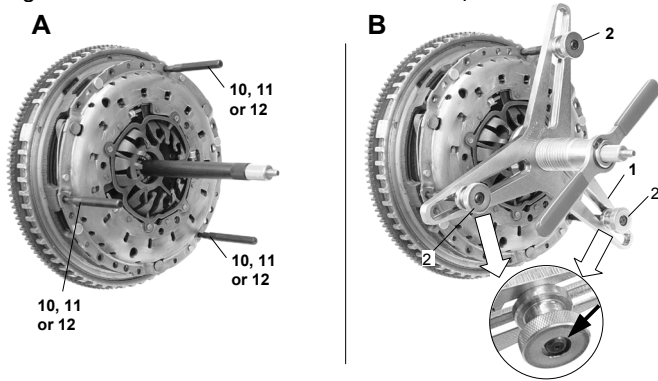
Screw in pressure spindle, screw in retaining screws.
